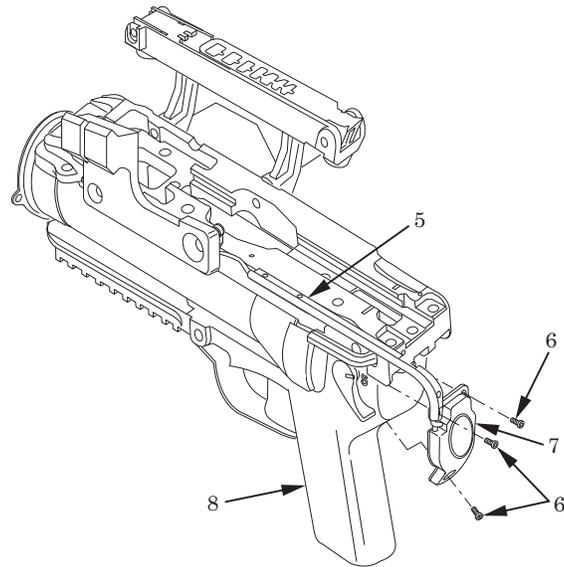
Installation of Remote Switch Assembly on Pistol Grip Assembly.
